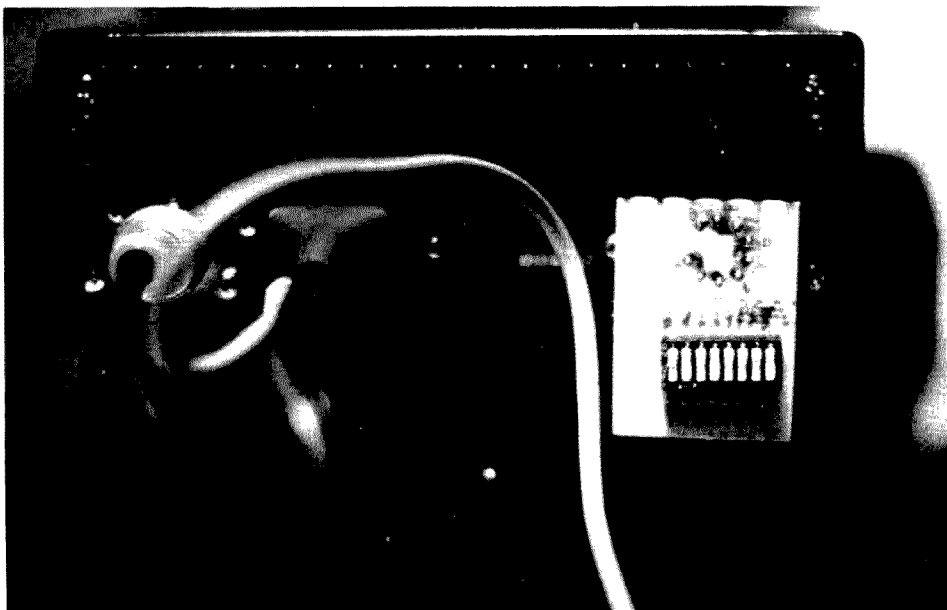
Parts placement. Parts side of PC board with switches. Note pin 6 is the common anode lug, while the other lugs have the wires on accessory socket going to the matrix board soldered to them to allow the board to be positioned parallel to the 22S. The prototype protruded downward in a precarious position. Also note that the plug is soldered onto the foil side of the board.
